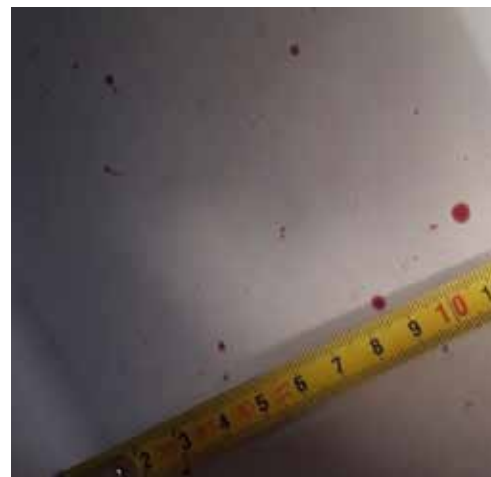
Defects on the diameter are still present and needs to be further machined
